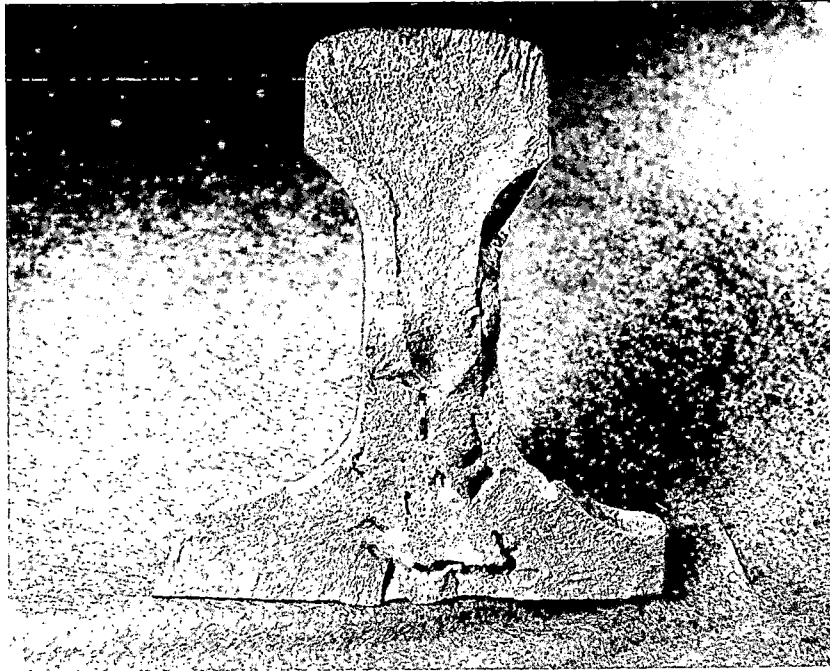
Fracture surface of #1 showing lack of fusion in the bottom half of the weld.
